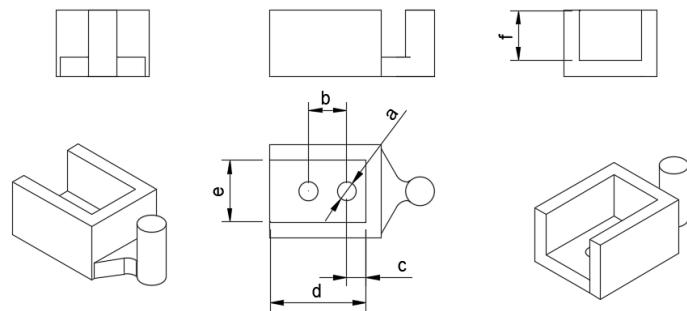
Volume Infused Fluid Mount Clamp Drawings
